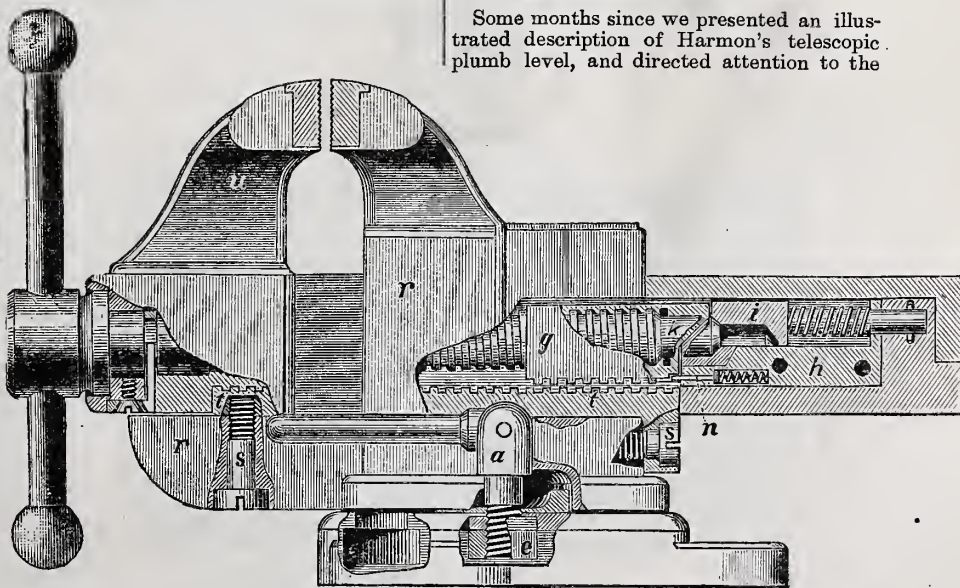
Section and Elevation of Improved Vise, Manufactured by Read, Gleason & Read, Brooklyn, N. Y.
